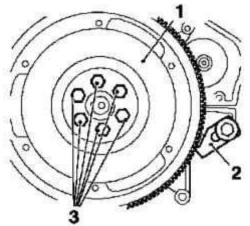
Removing the flywheel: 1 - Handwheel, 2 - a special device,
